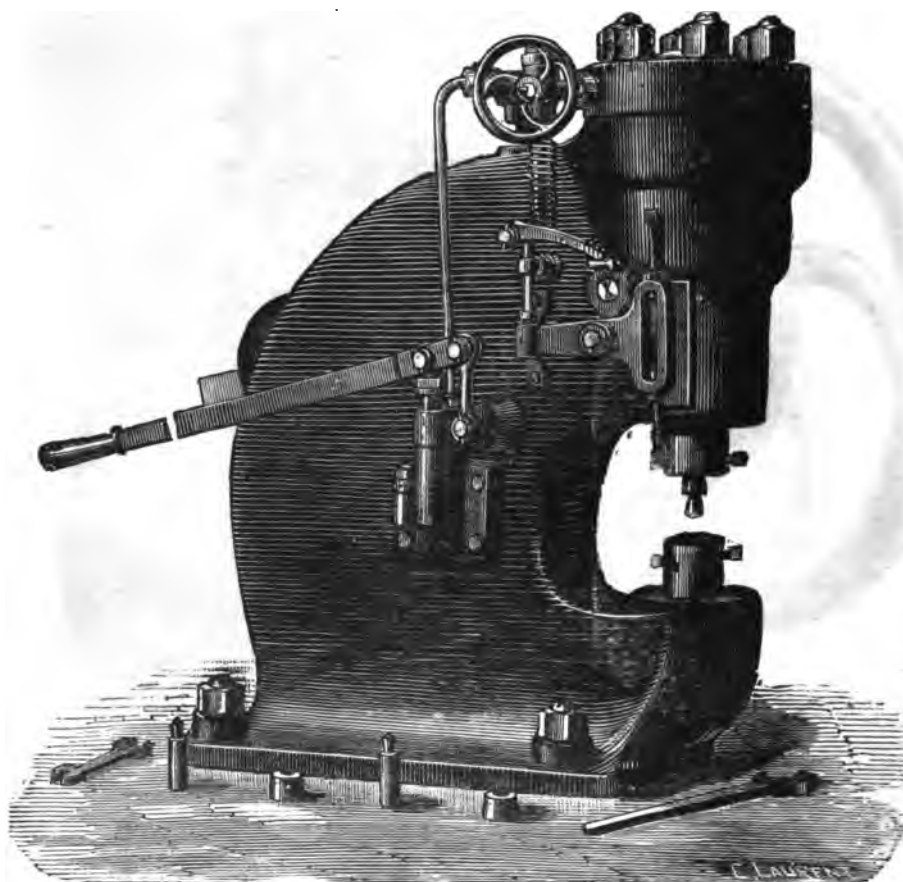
HYDRAULIC PUNCHING MACHINE.—See page 363.
